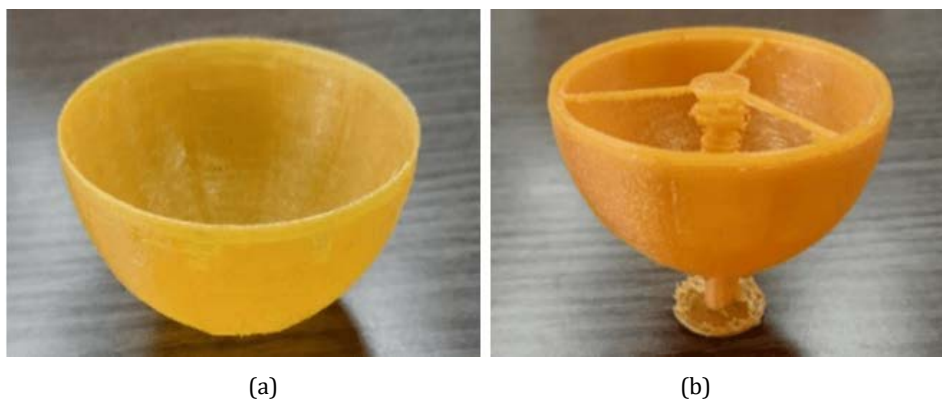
(a) 3D printed upper part of the Reflector model and (b) 3D printed Lower part of the Reflector model with the feed array
